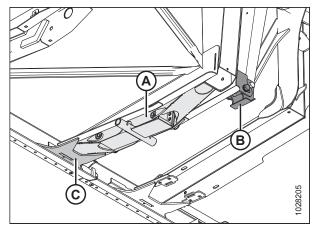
Inboard Arm Assembly Installed in Left Header Leg – View from Below
